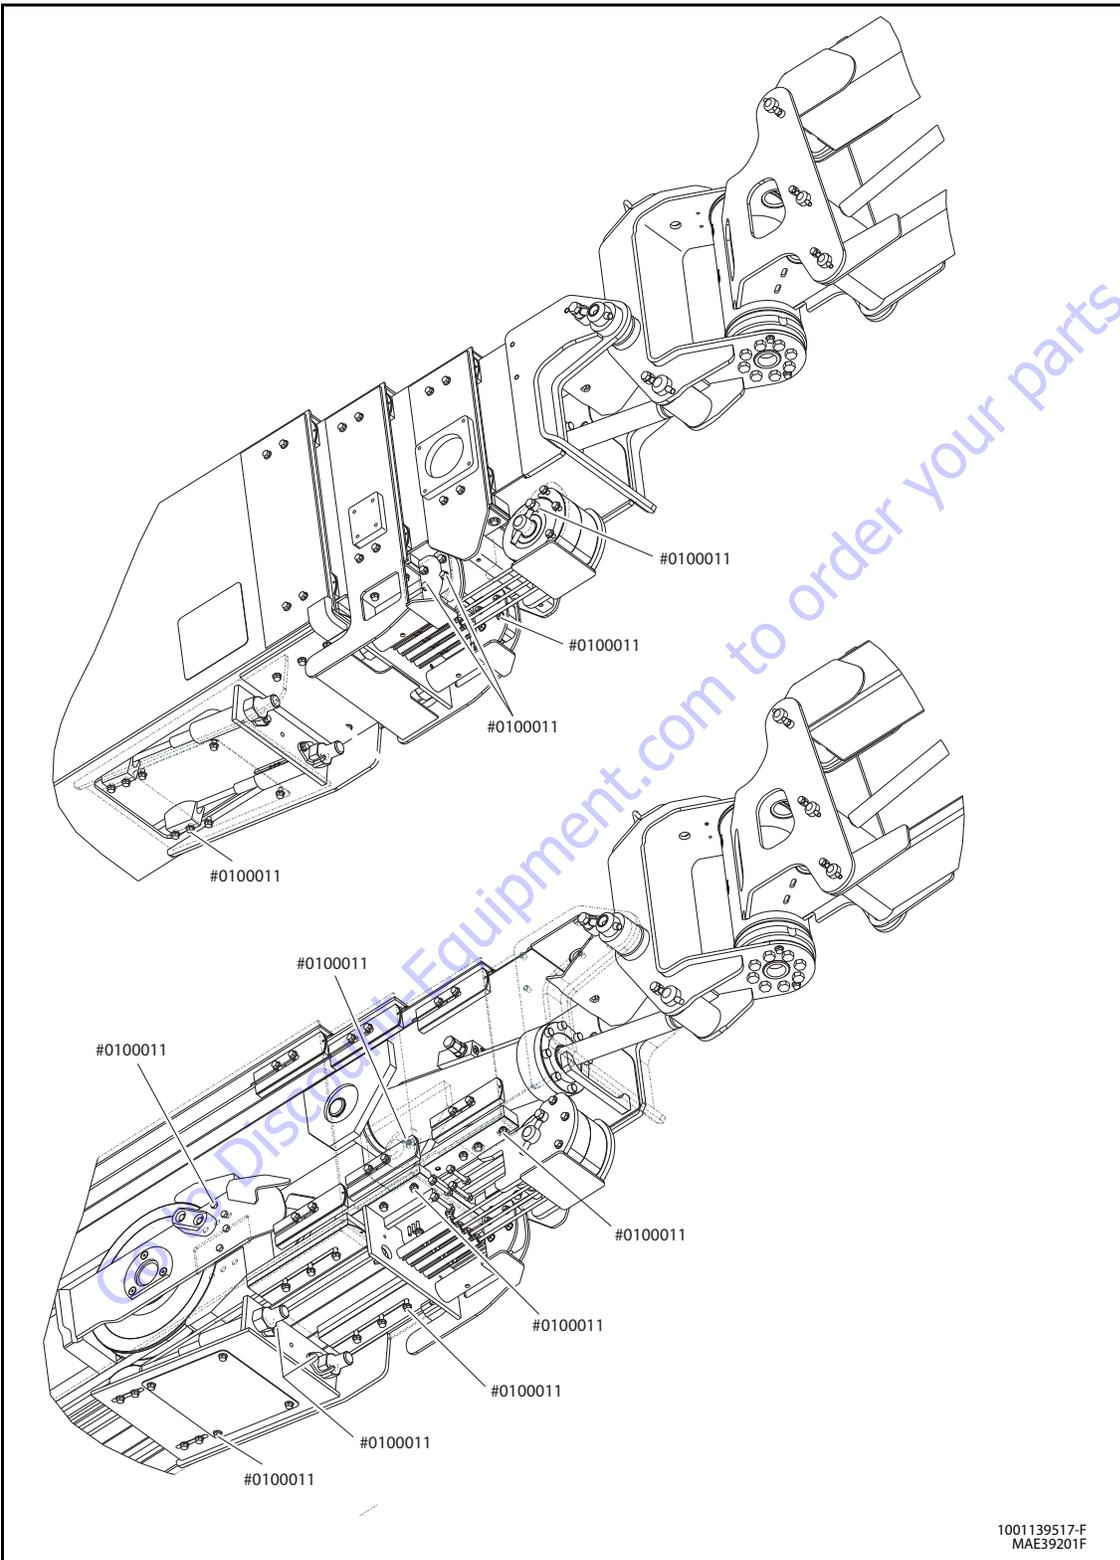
Locations for Threadlocker Application - Sheet 3 of 4
